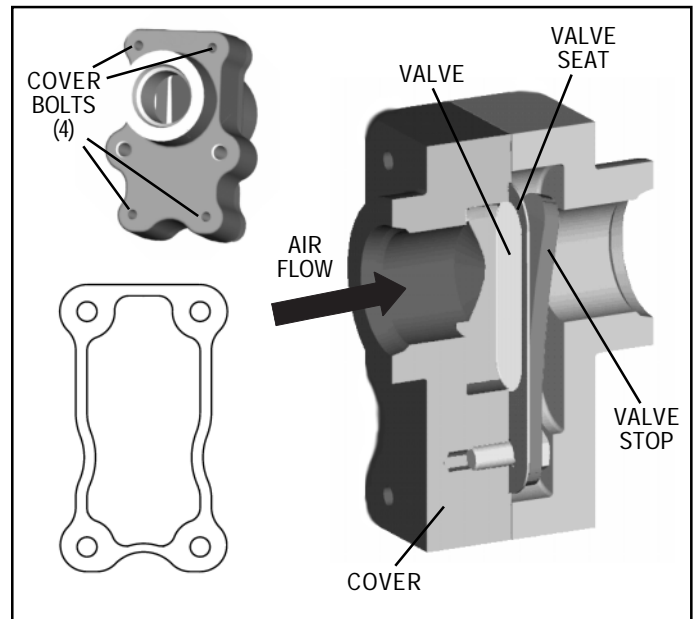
INLET CHECK VALVE ASSEMBLY AND GASKET
